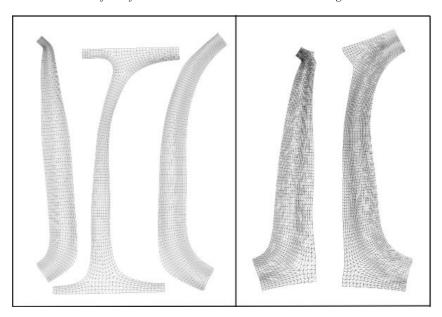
Unfolded lamination surface of B-PIllar mold with indicated cutting lines.
